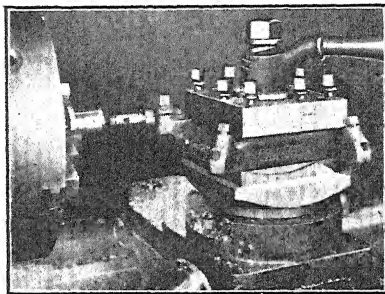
The McCrosky Style-L Four-Way Turret Tool Post.
